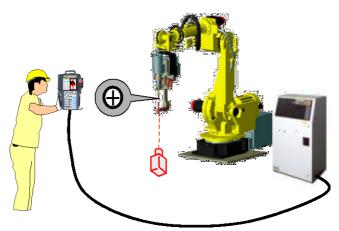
(f) Installation example for spot welding
